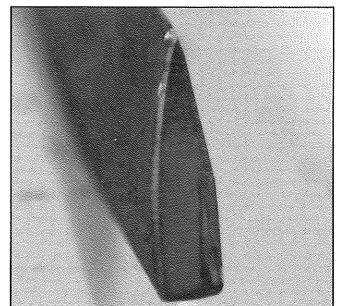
High-carbon steel drawn down and shaped to fit in chisel cut
